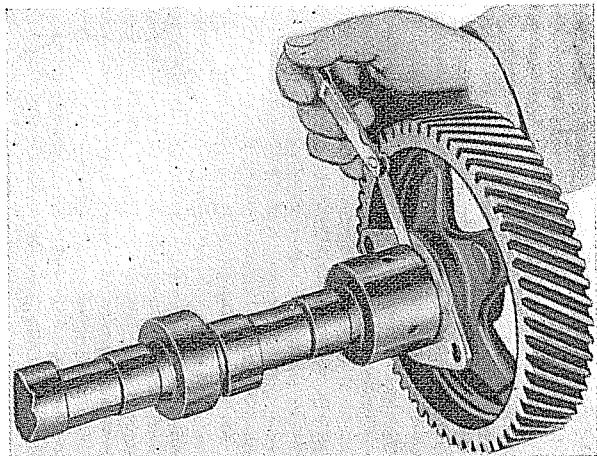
Typical Illustration, Measuring Camshaft End Play.
